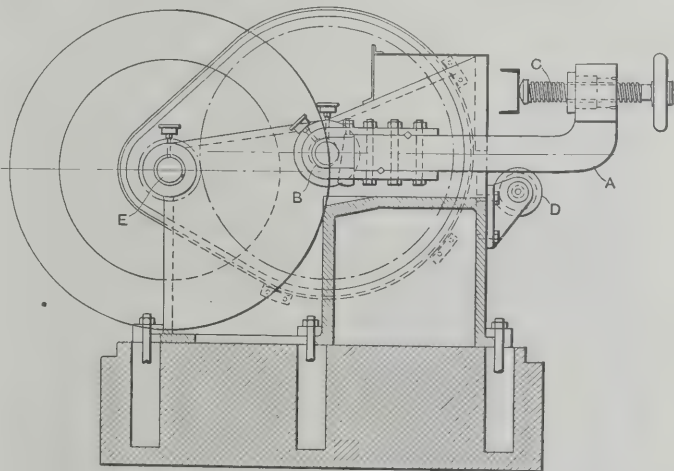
The Power-driven Bending and Straightening Machine forming an Angle-iron
